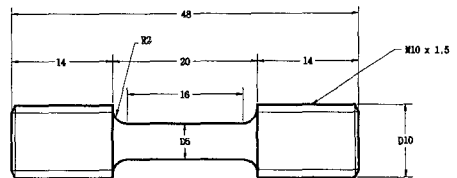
Dimension of the aluminum specimen (unit: mm)
